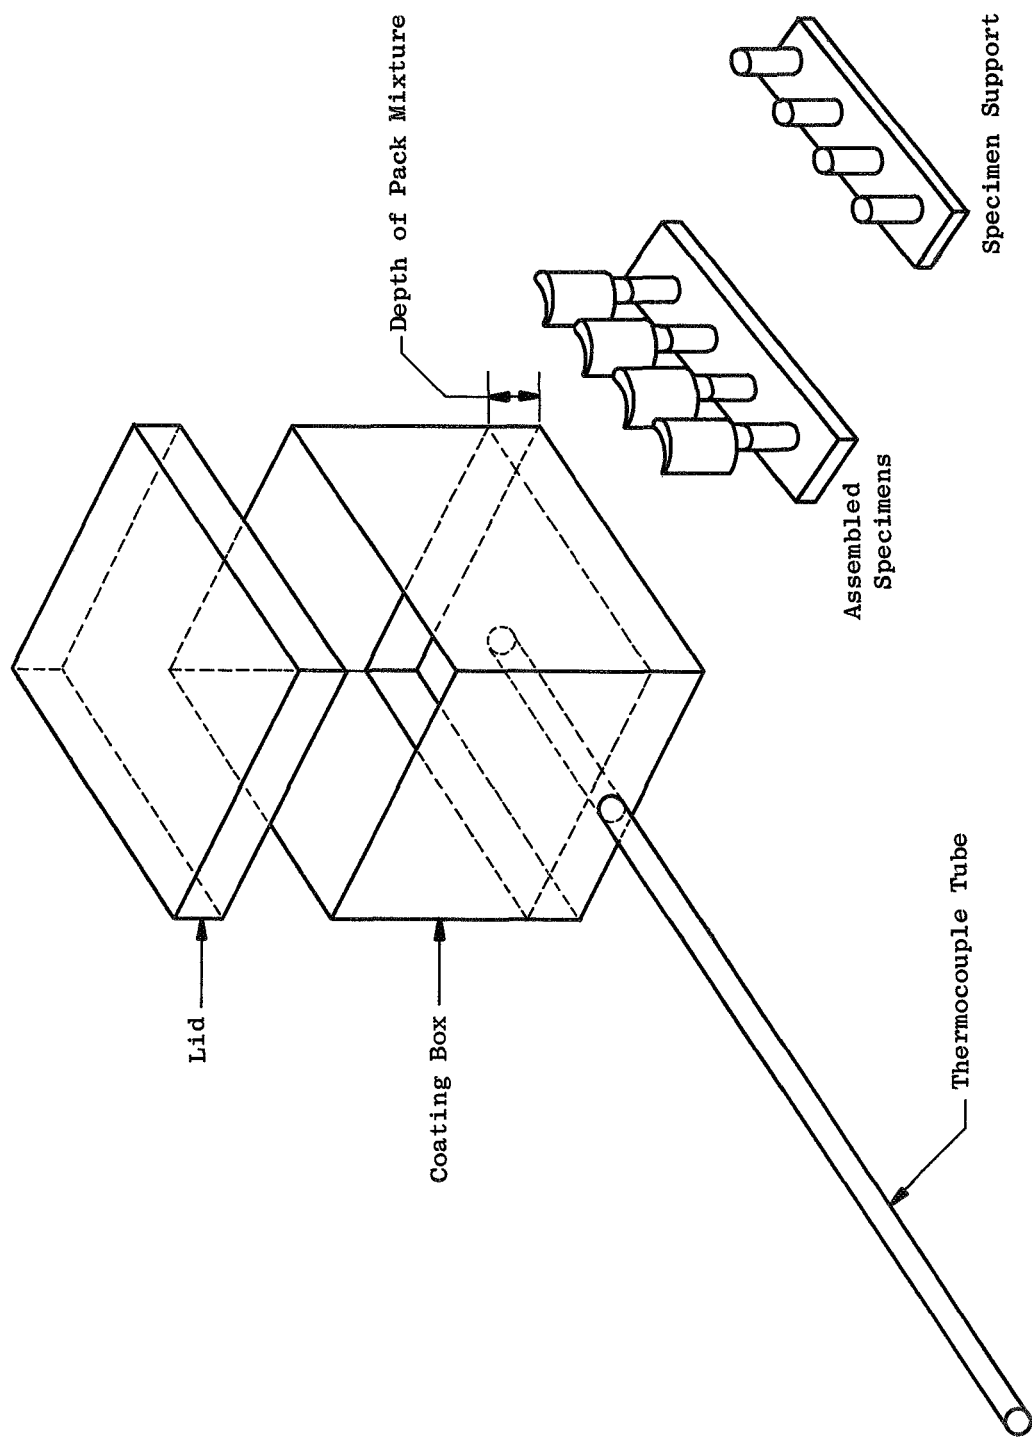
Schematic of Coating Box and Specimen Support Fixture.
